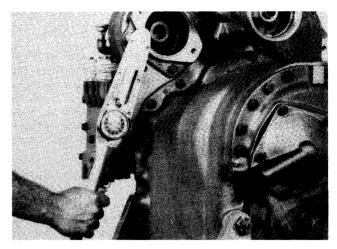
Install bolts and washers. Tighten to specified torque. (See torque chart).
